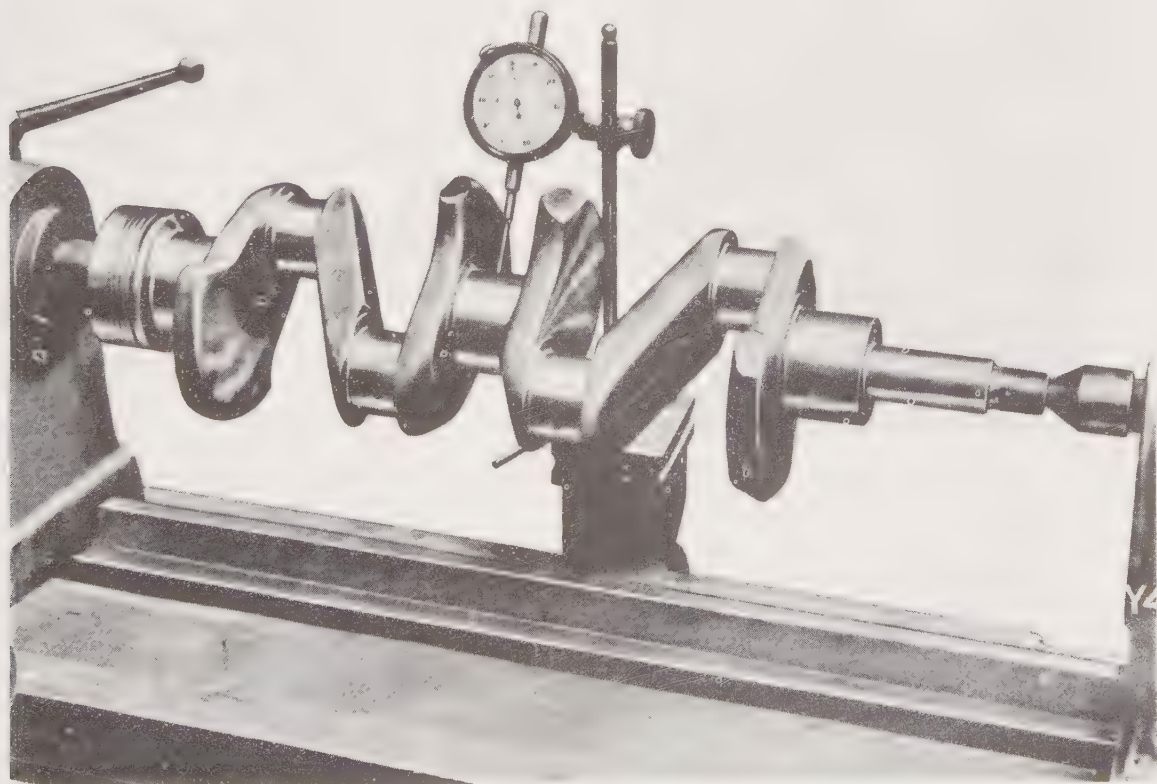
34 Measuring crankshaft run-out by means of dial gauge.
